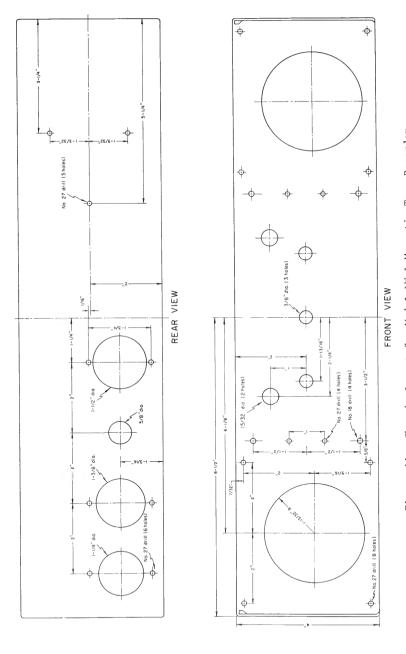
Chassis layout for Model LW-1 Magnetic Tape Recorder rear and front views.
